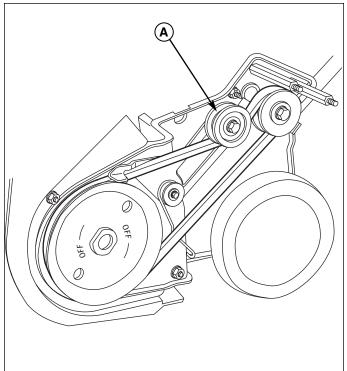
Drive Belt Bracket A. Spring-Loaded Idler Pulley
